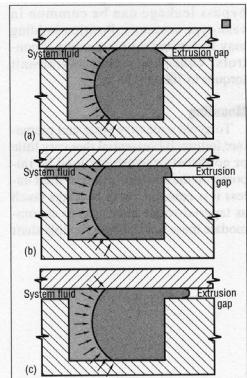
As system fluid pressure increases, (a) to (b), an O-ring seal is progressively forced into the extrusion gap. Finally, (c), the physical limits of the seal material have been exceeded.
